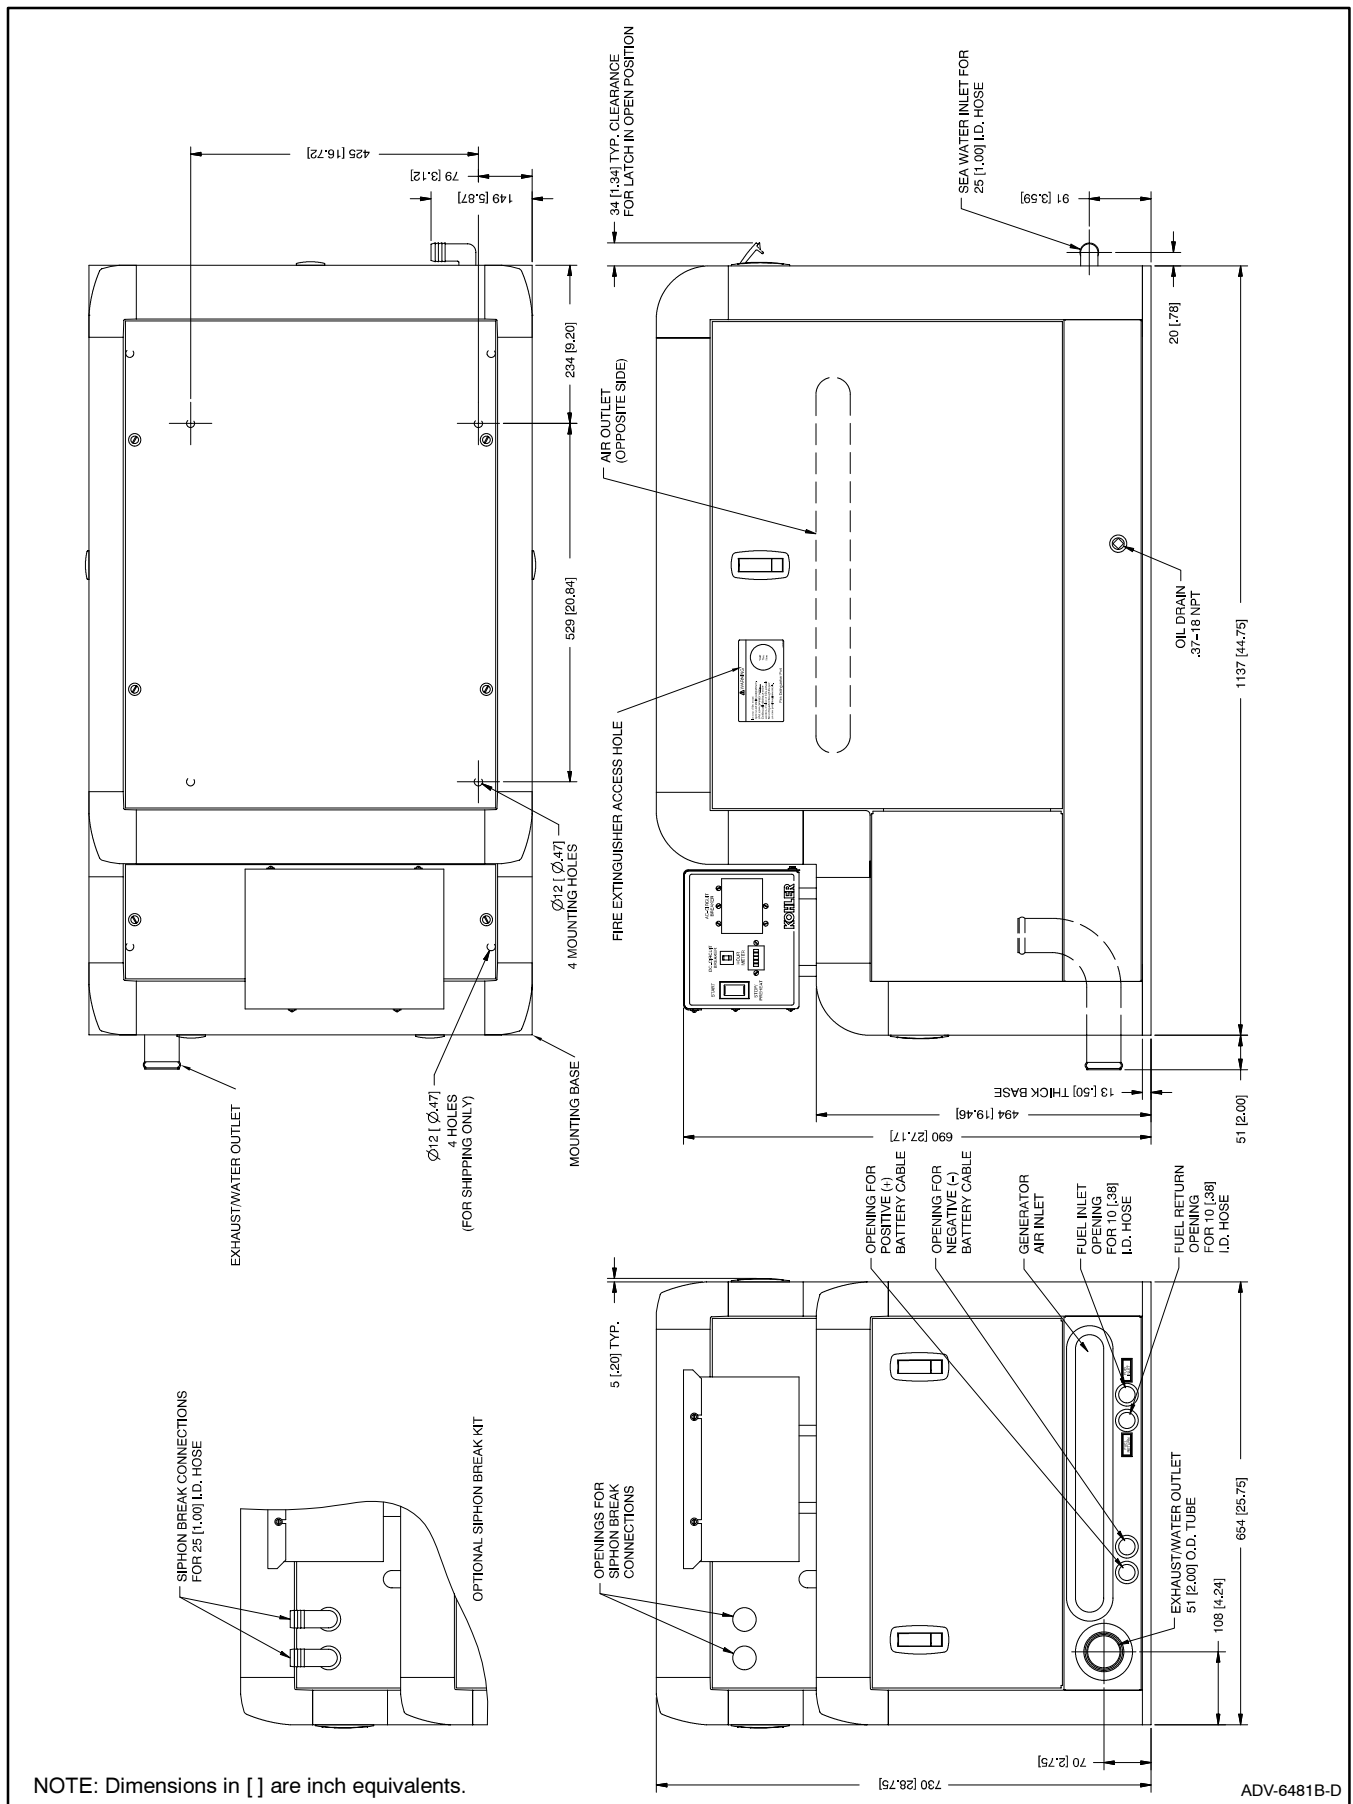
Dimension Drawing, 16/17.5EFOZ and 20EOZ with Sound Shield
